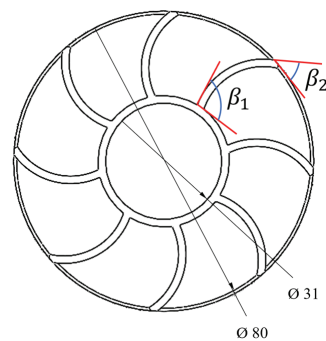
Inlet angle (β_1) and outlet angle (β_2) of the swirl generator blade
